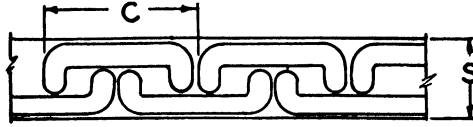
A more economical layout for the part shown in Fig. 1. This is the scrap-strip design generally used for blanks of this type.
